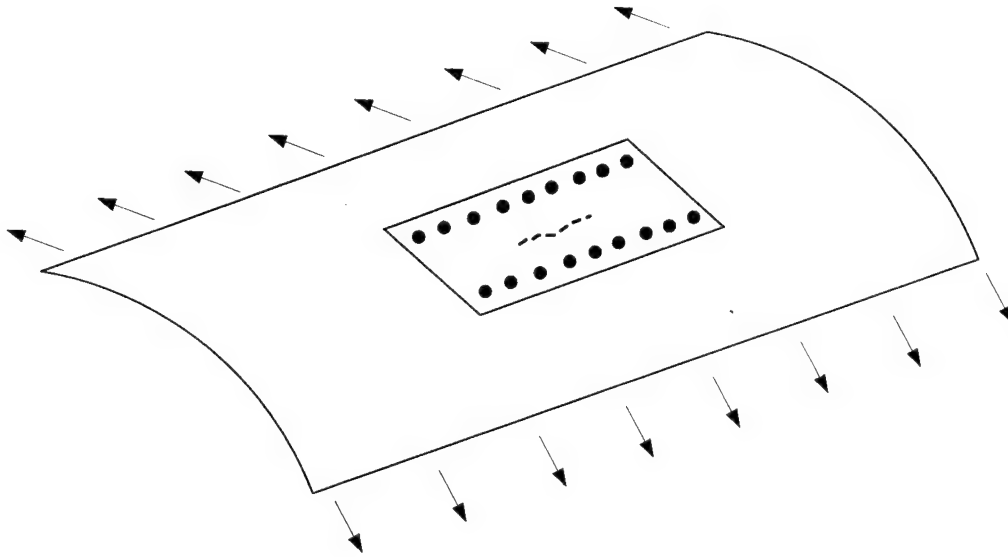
Mechanical Repair: Doubler Patch Riveted to Aircraft Skin.
